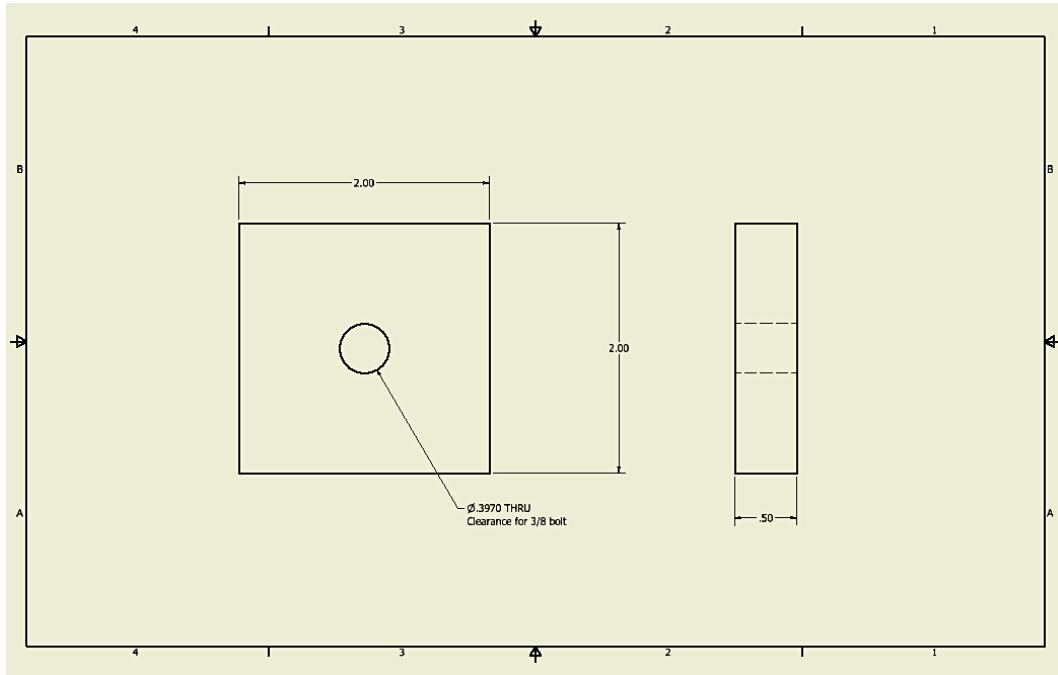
Dimensional drawing for pneumatic impactor spacer
